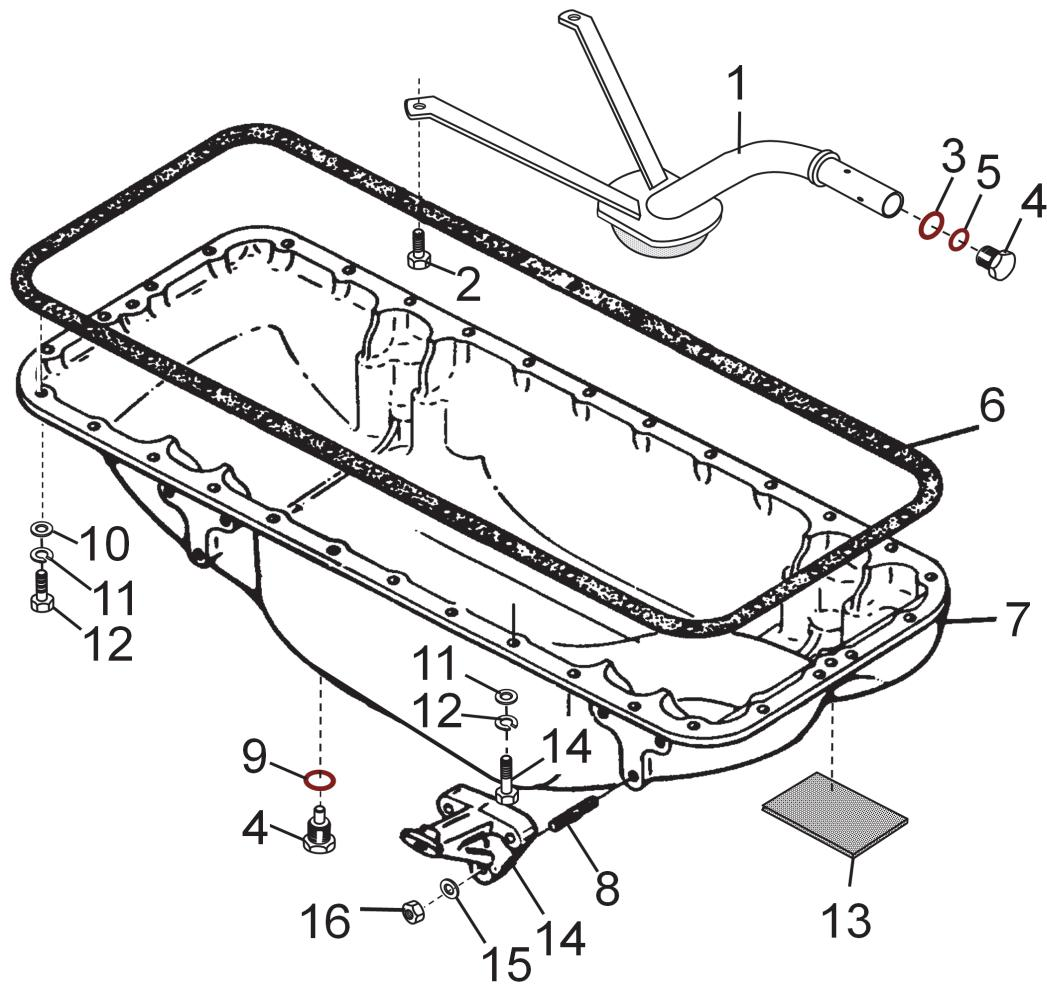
IO-550-B & R Oil Sump Assembly B R
